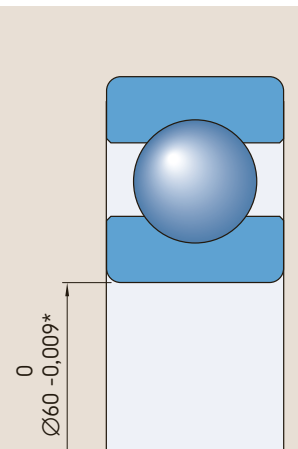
Rolling bearing with dimension and tolerance for the bore diameter.
